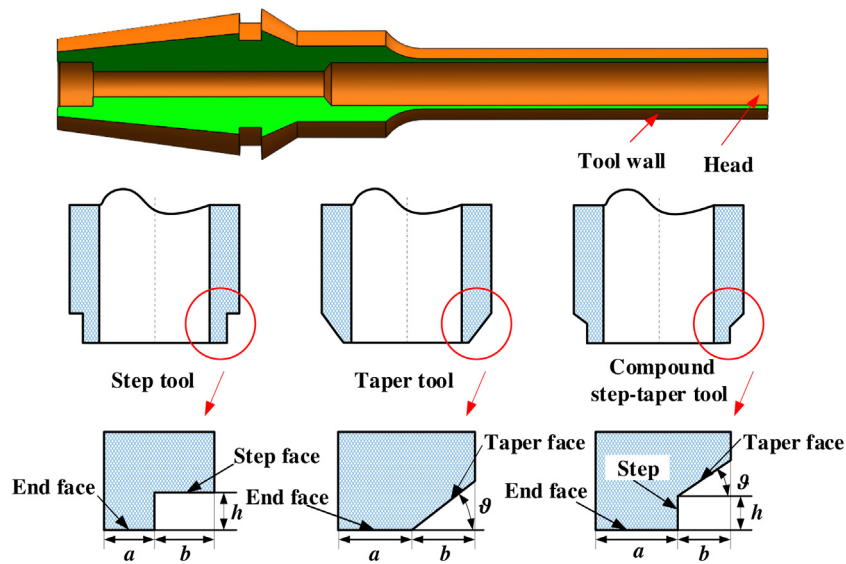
Inheritance of step-taper compound tool from the step tool and the taper tool.
